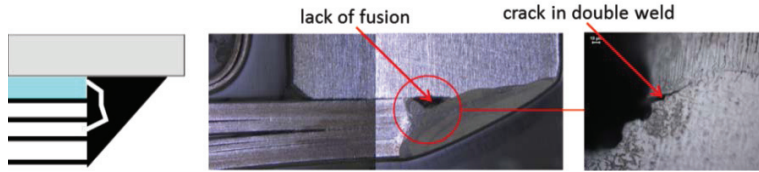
Crack in double weld allowing helium passing in between the plies.
